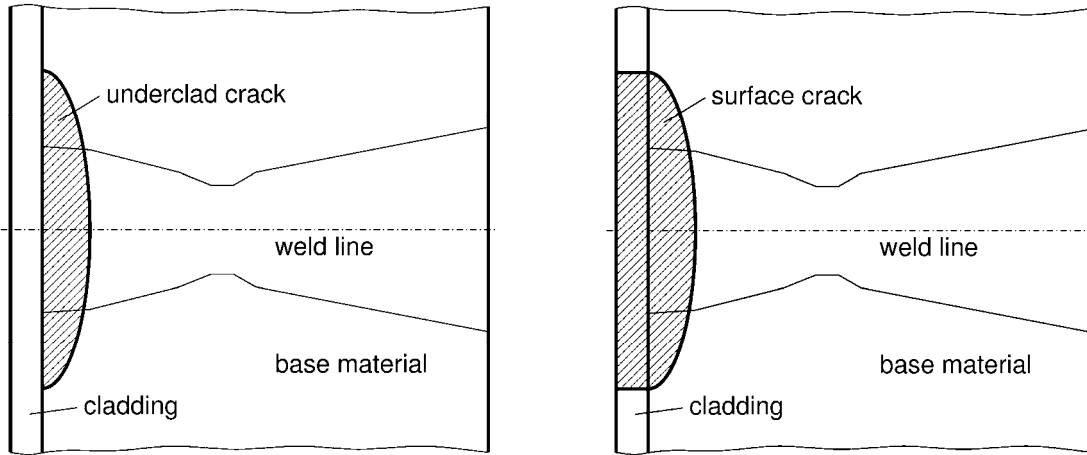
Two types of crack in the core weld seam: underclad crack (left) and surface crack (right)
